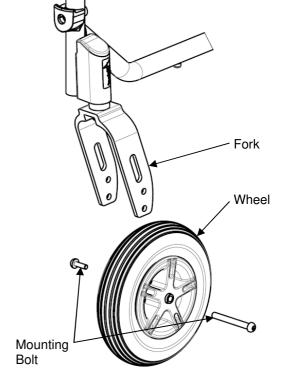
Removing/Installing/ Repositioning the front wheel
